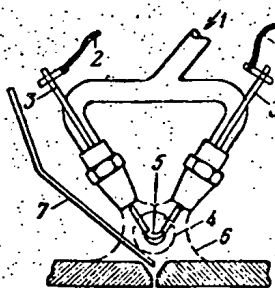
Schematic Diagram of Atomic Hydrogen Welding Process:
